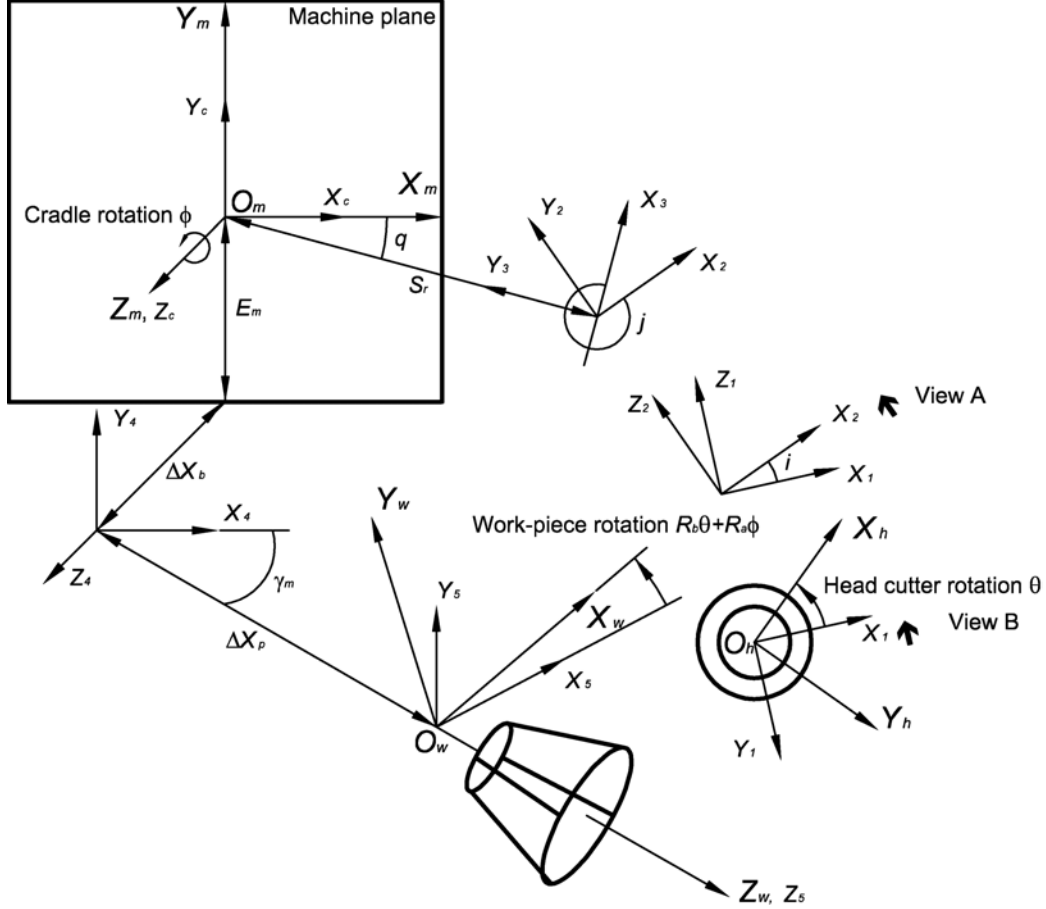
Sketch of a cutting machine set up for manufacturing a generated FH gear drive.
